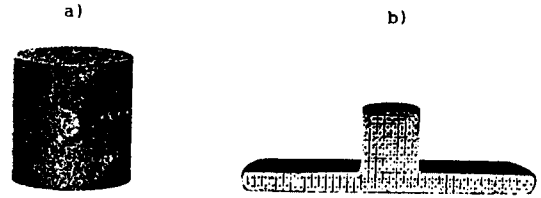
Workpiece for the forming experiment (left: before forming, right: after forming)
